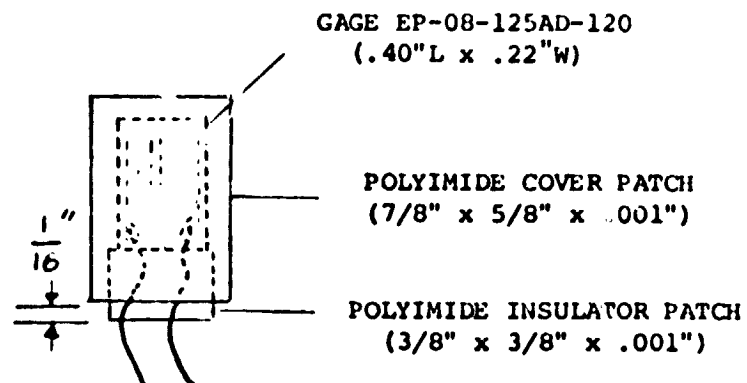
POLYIMIDE COVER PATCH DIMENSIONS AND LOCATION
